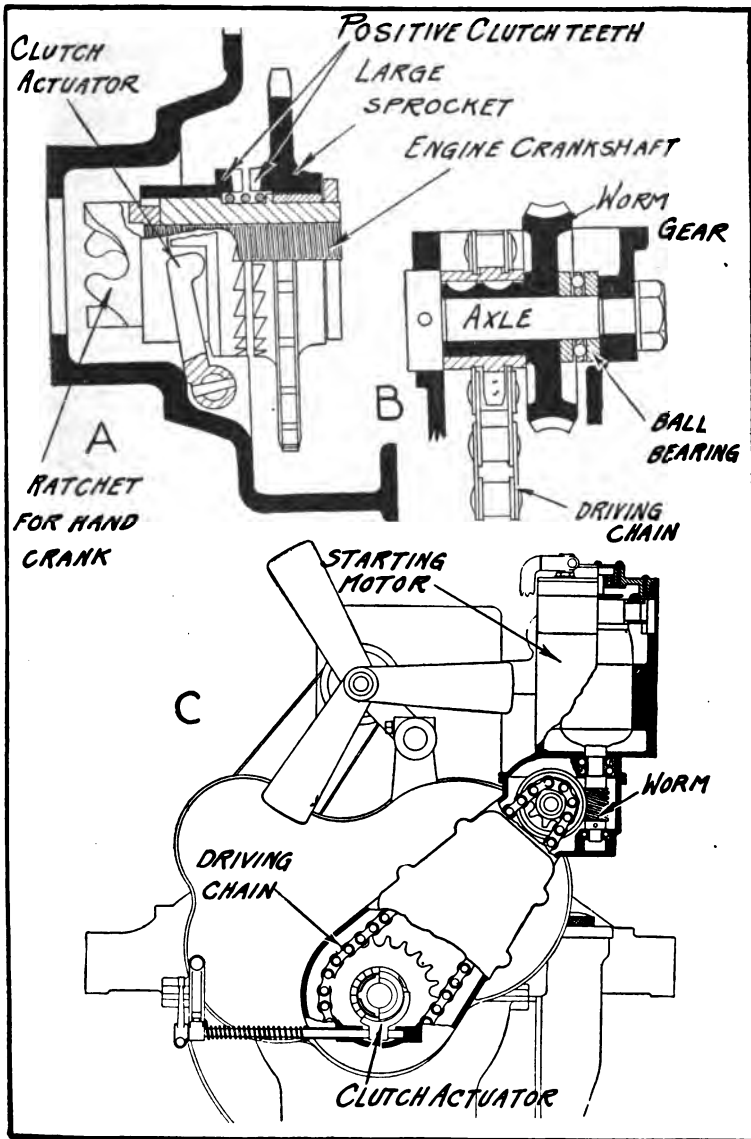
Diagram Showing Application of Worm Reduction Gear to Turn Over Engine Crankshaft Through Supplementary Chain and Sprocket Reduction.
